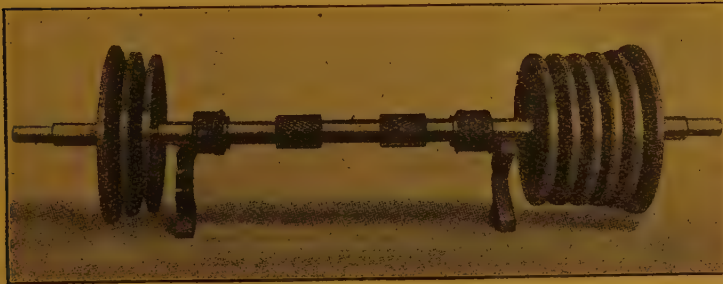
Rotors of forward and backward turbines with spiral gears on shaft.
